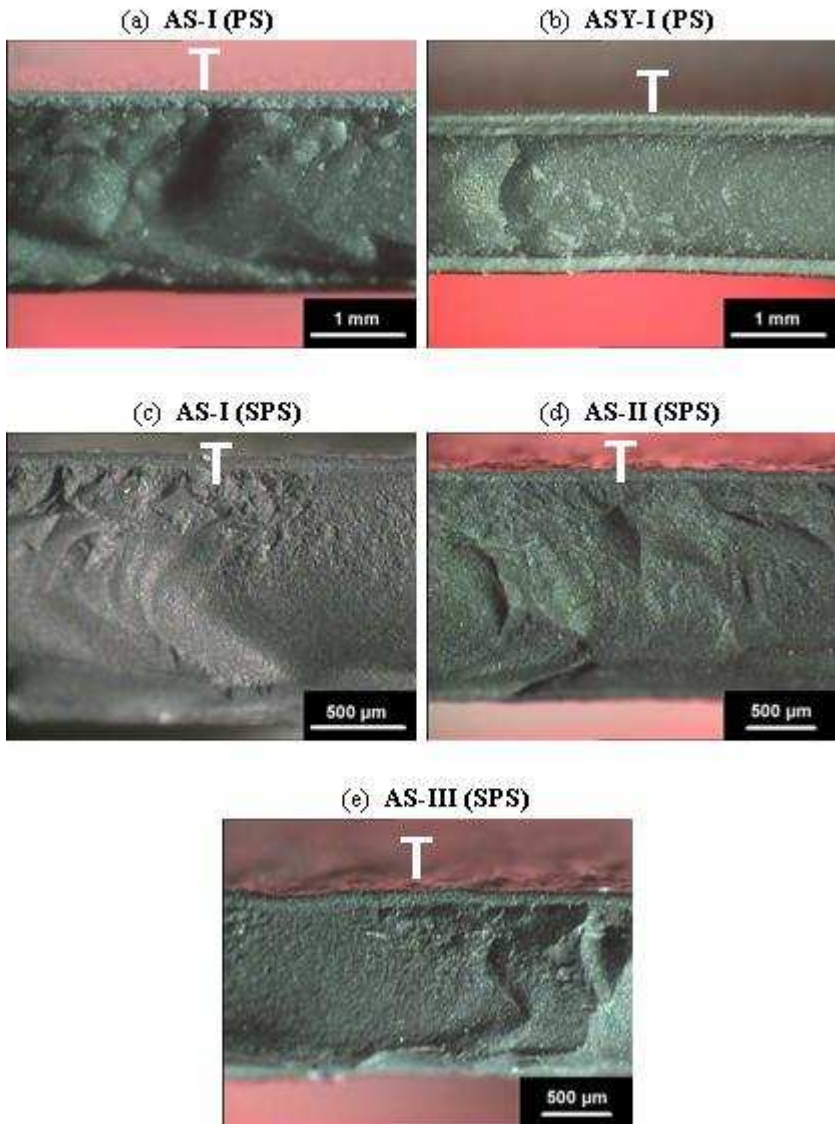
Particular of fracture surfaces of engineered laminates samples. A smooth narrow region with a through thickness geometry is present just beneath the tensile surface (indicated by T).
